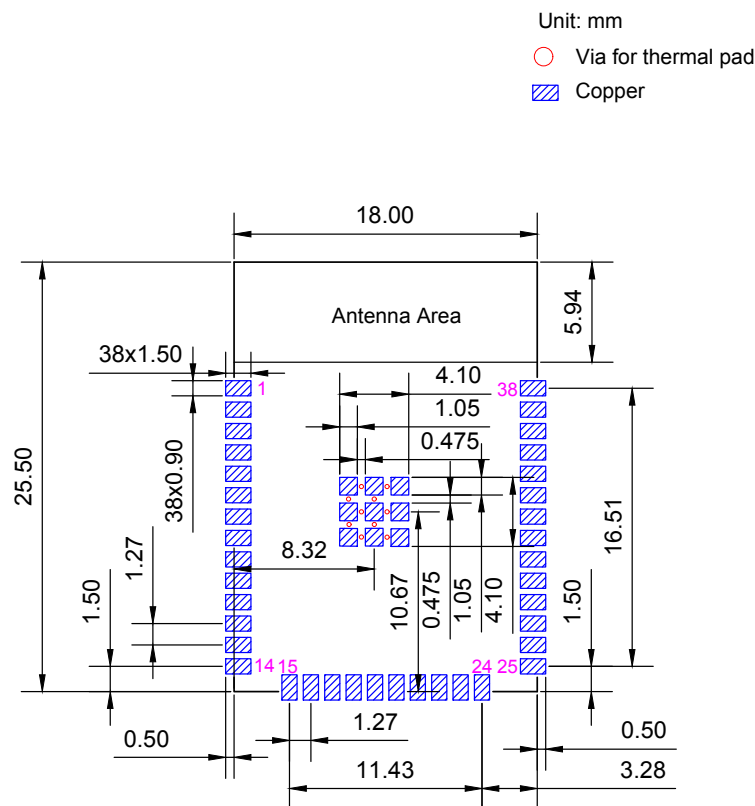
ESP-32-WROOM-32D recommended PCB land pattern [65]
